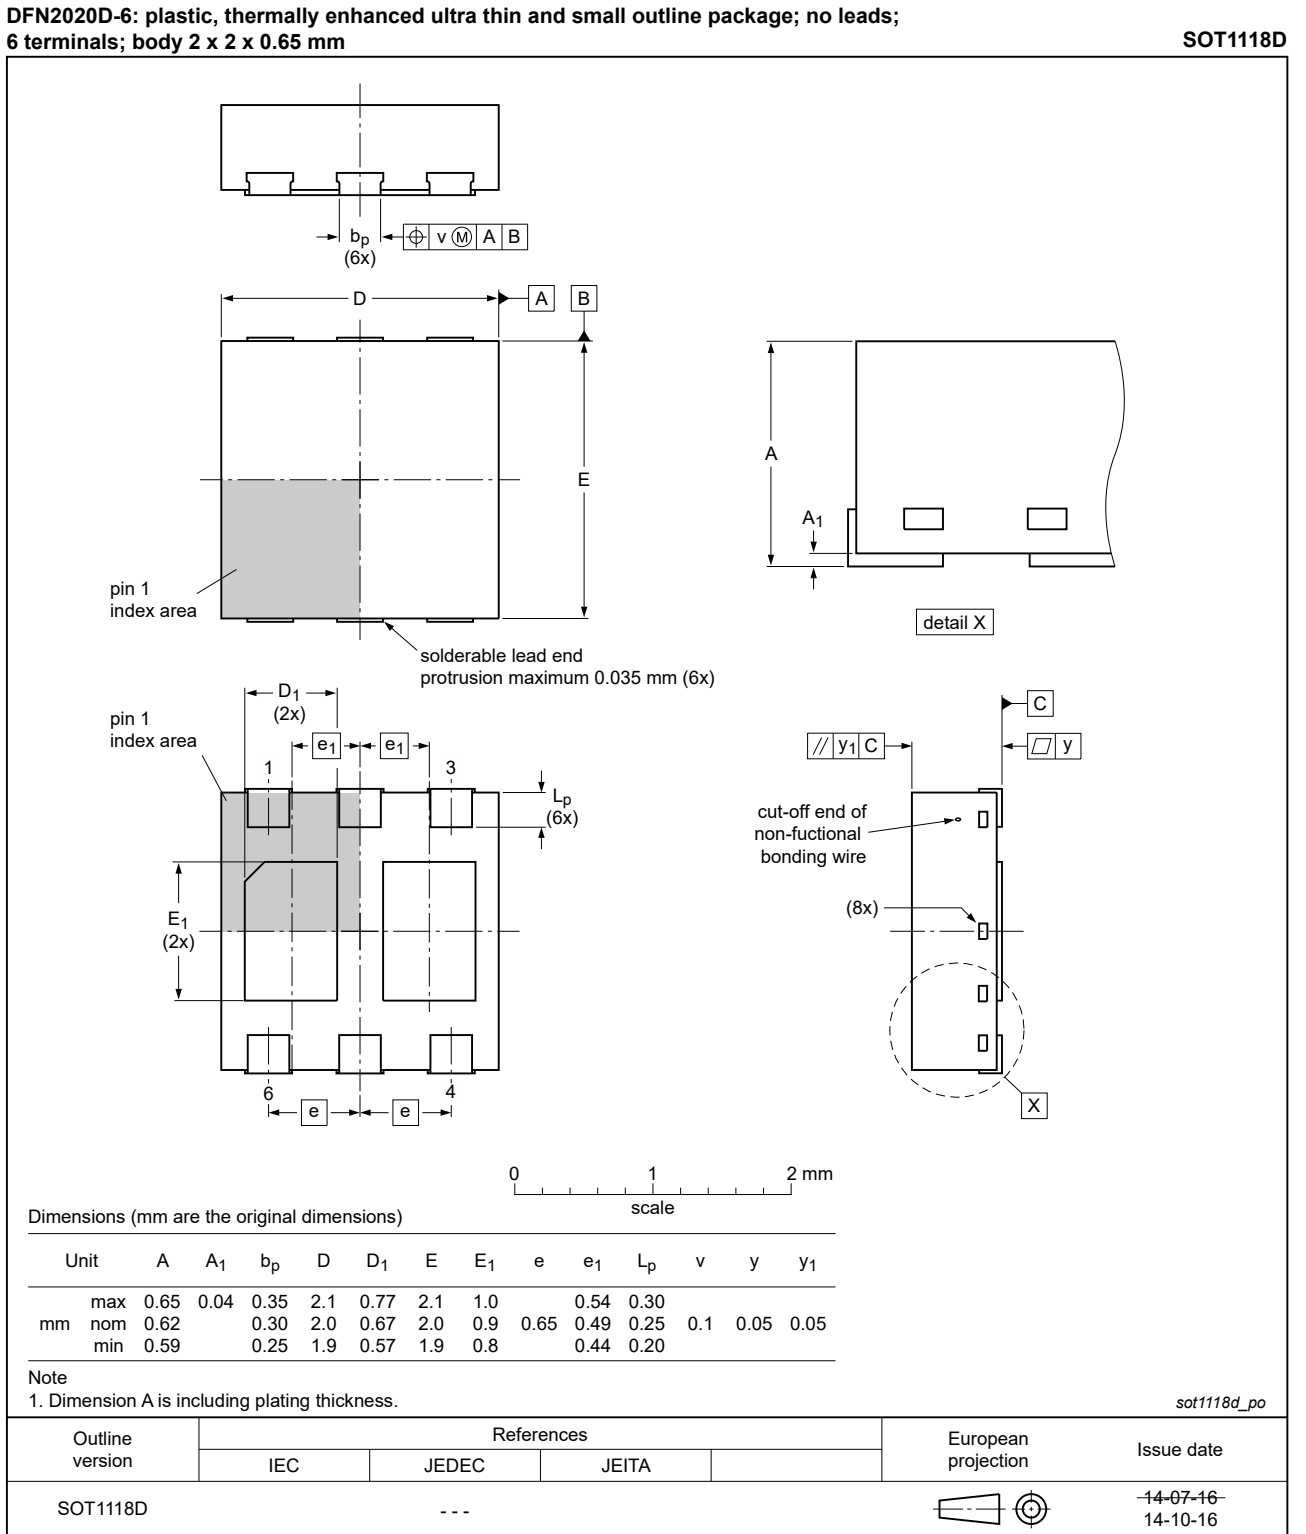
Package outline DFN2020D-6 (SOT1118D)
